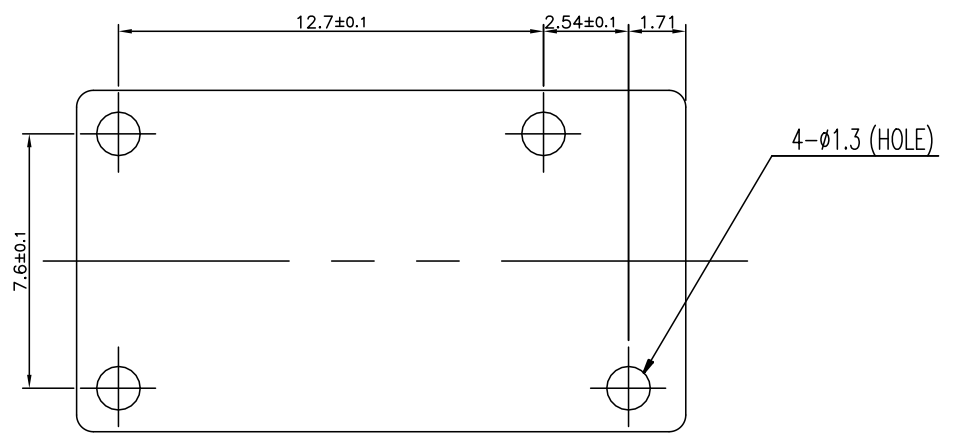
FIGURE FOR PRINTED CIRCUIT BOARD PROCESSING (BOTTOM VIEW)
